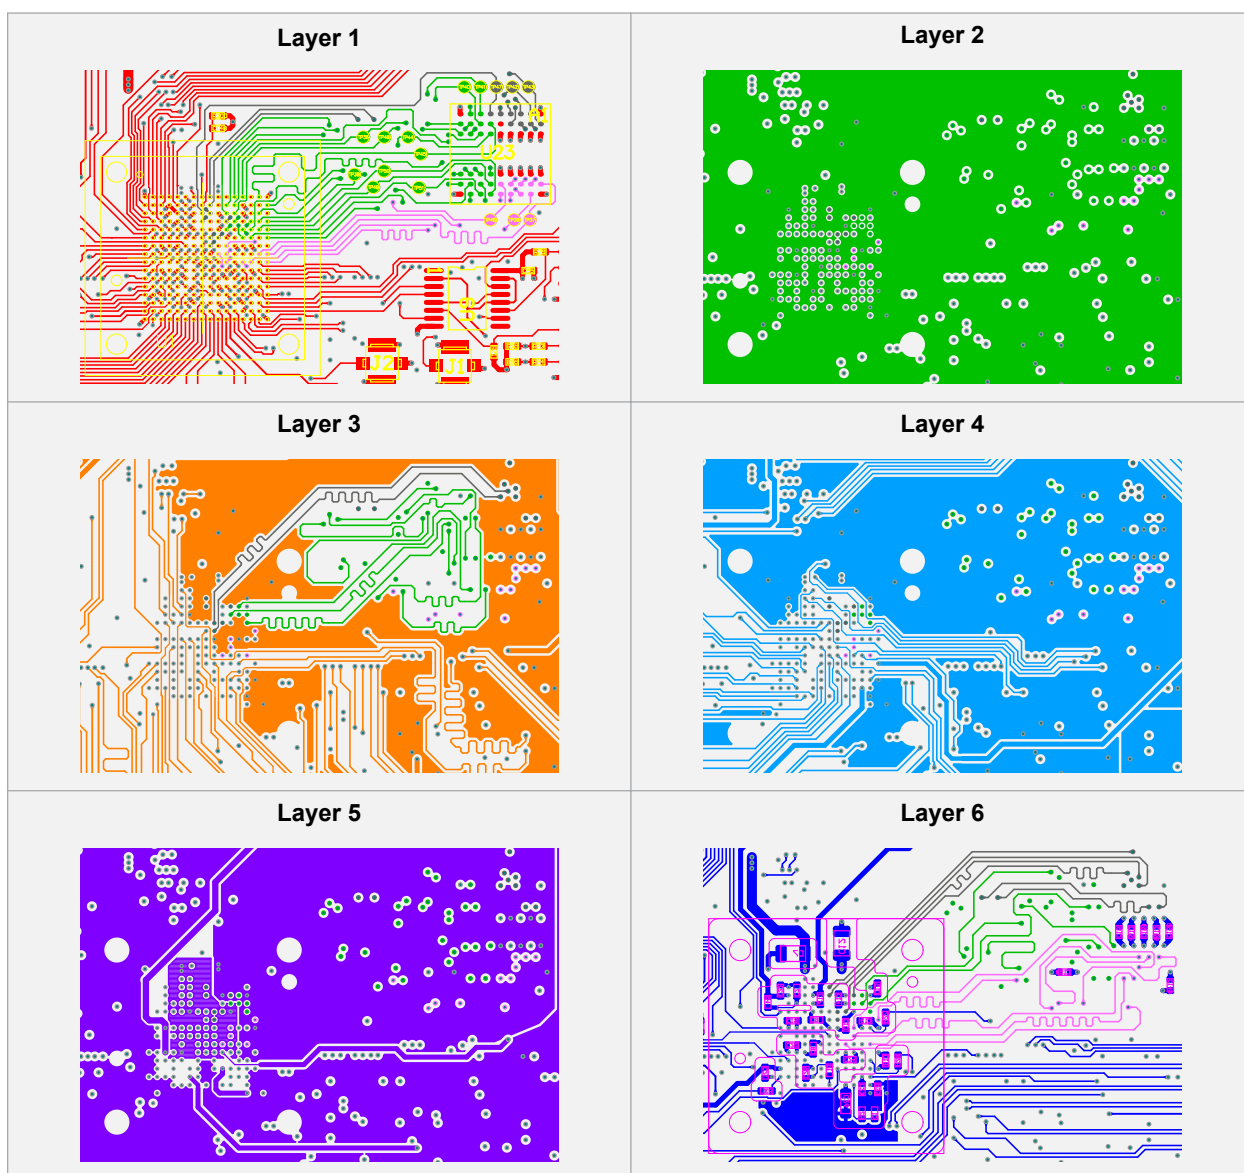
LP-SDR and SDR SDRAM 6-Layer PCB Layout Example
